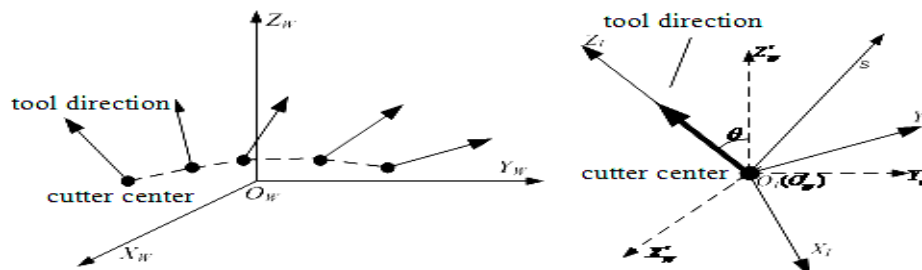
Linear description of five axis machining tool bit and expression of dual four element
